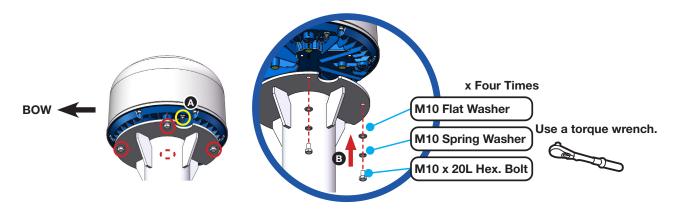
Mounting Antenna using Outer Holes (with M10 Bolts)
